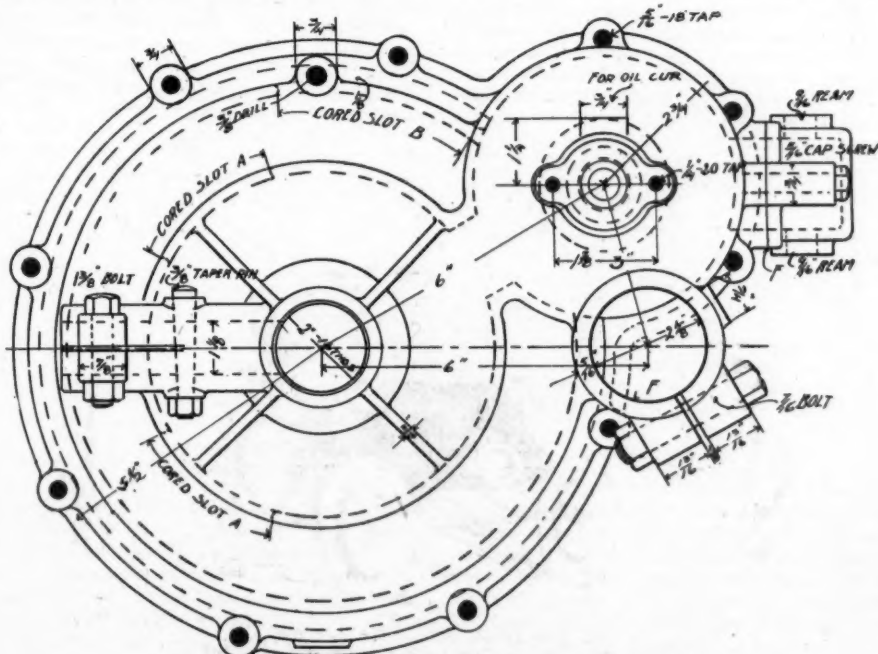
SIDE ELEVATION OF GEAR CASE.
